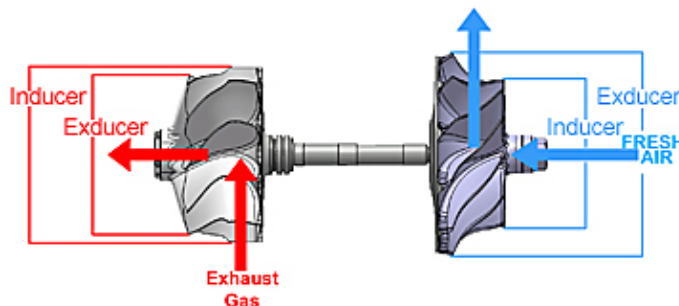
Common shaft turbine (left) and compressor (right) [32]
